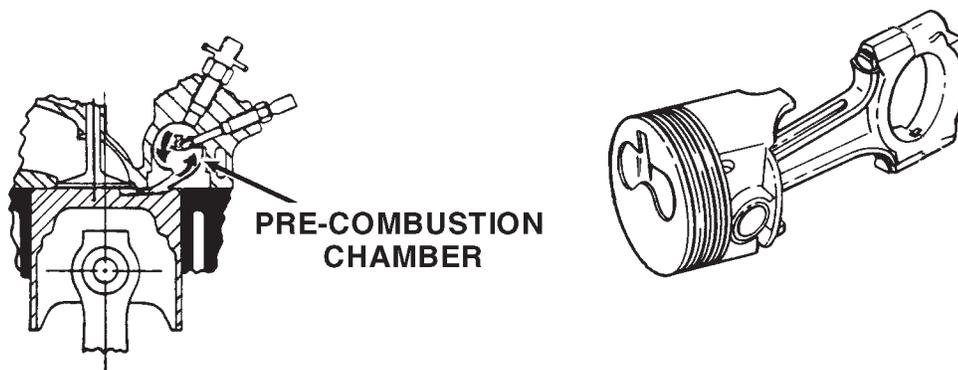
Pre-combustion Chamber and Piston Crown Shape.
